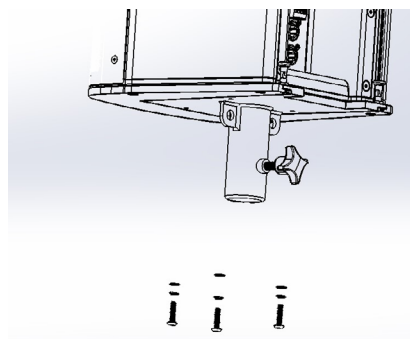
secure screws and washers to Pole Mount & Cabinet
